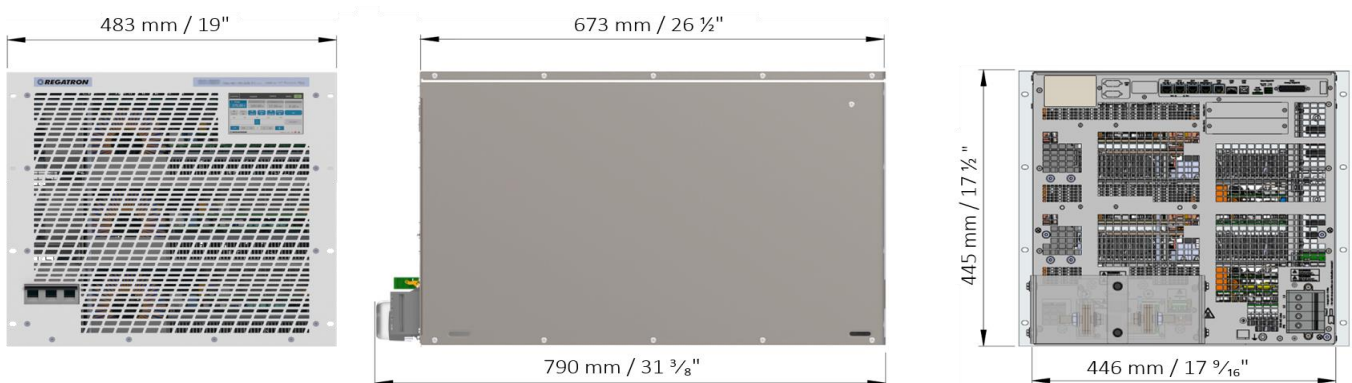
Front, right hand side and rear view. 19-inch module with 10 units in height.
